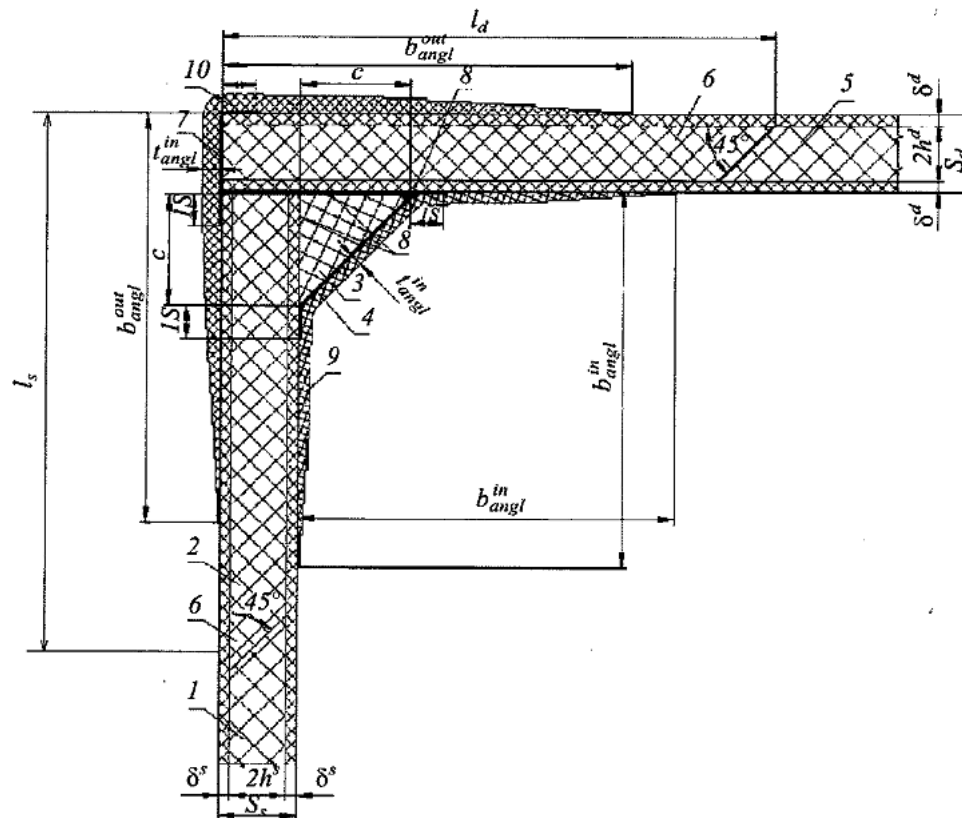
Joint of the upper deck plating and side plating of sandwich construction (Type A):
